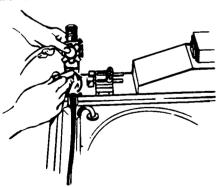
SECURE SCOPE OPERATING HEAD.
